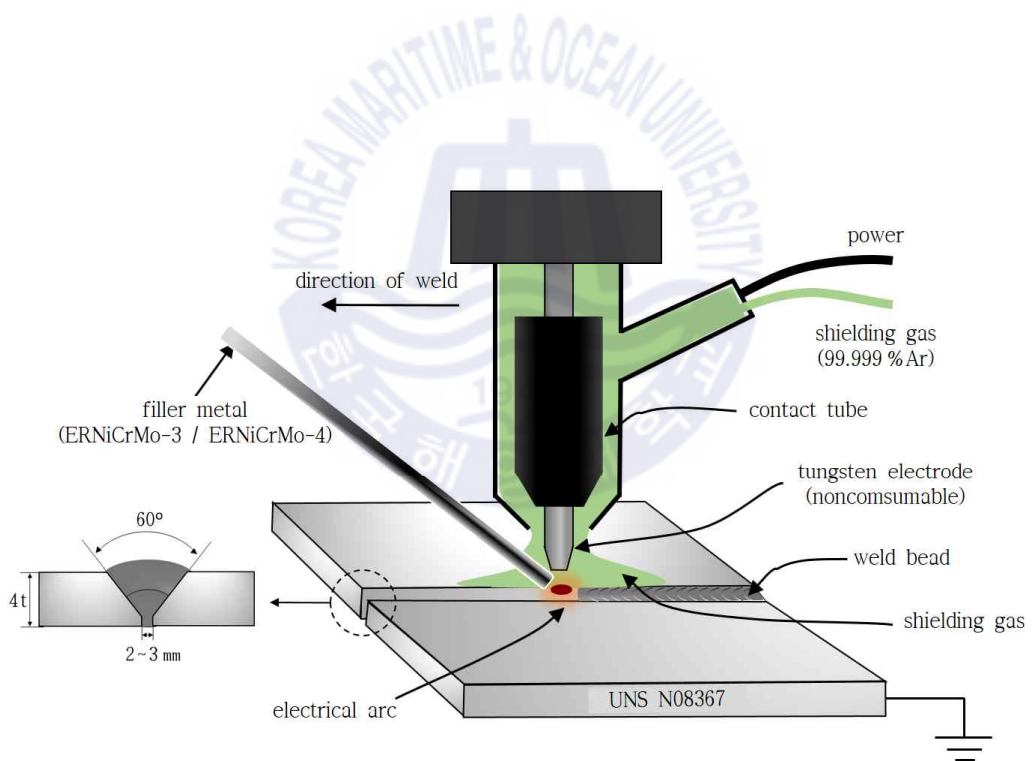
Schematic of a gas tungsten arc welding system
